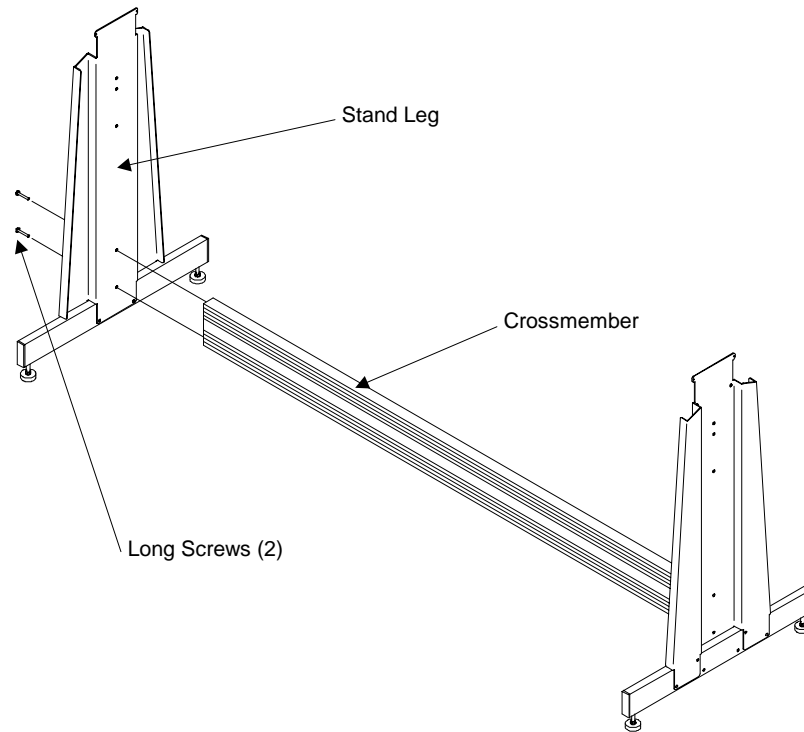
Attaching the Bottom Crossmember to the other Stand Leg
